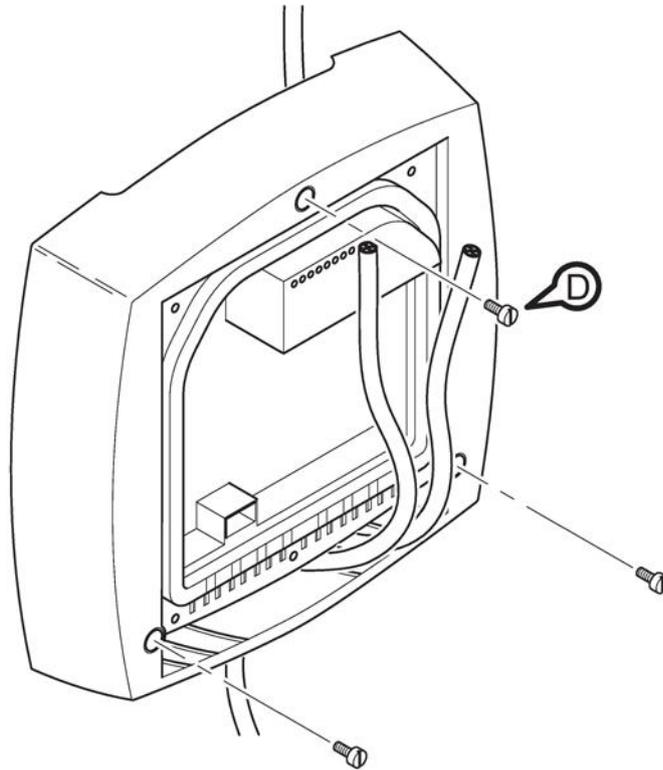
Screwing a SCALANCE W786 to a mounting plate
